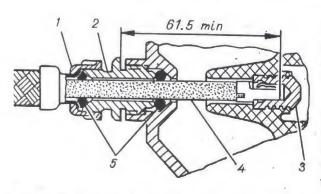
INSTALLATION OF WIRE IN IGNITION COIL CAP SEAT 1 - nut; 2 - union; 3 - seat; 4 - wire; 5 - packing rings
